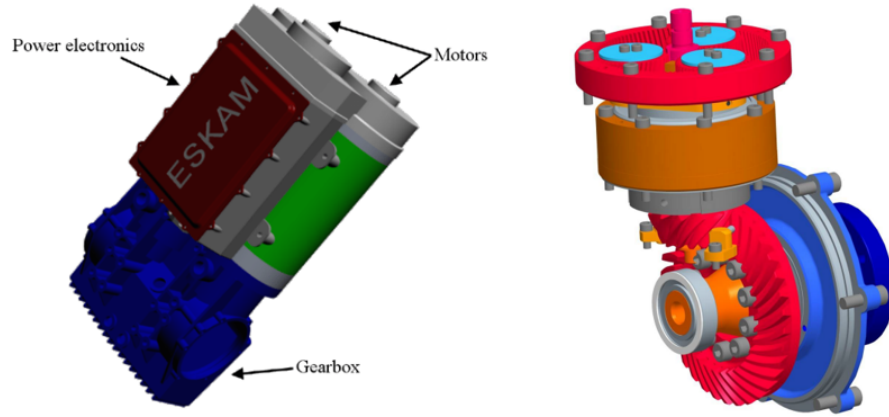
ESKAM axle module with integrated motors (left) [46]. Gearbox (right) [45].
